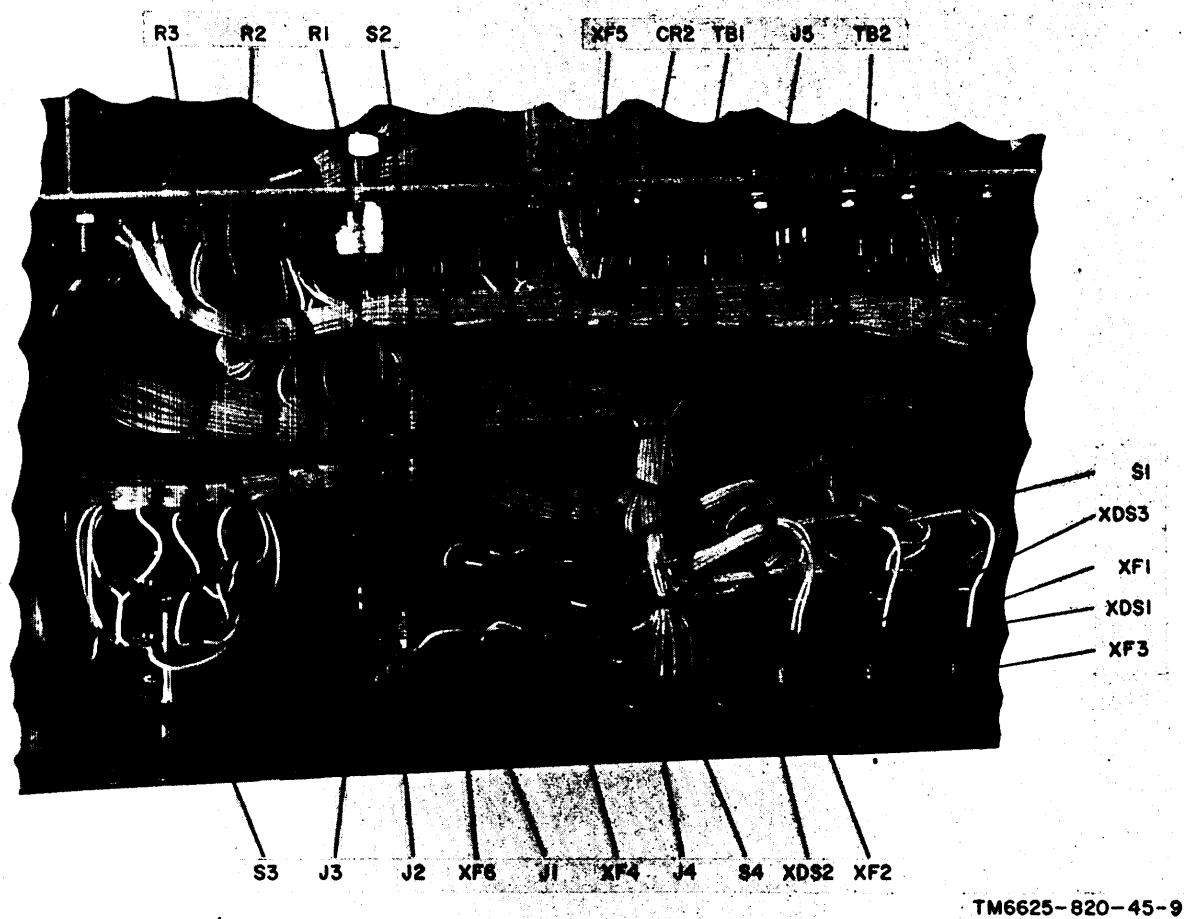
Bottom view of Test Set, Radio TS-2500/ARM-92, front panel.
